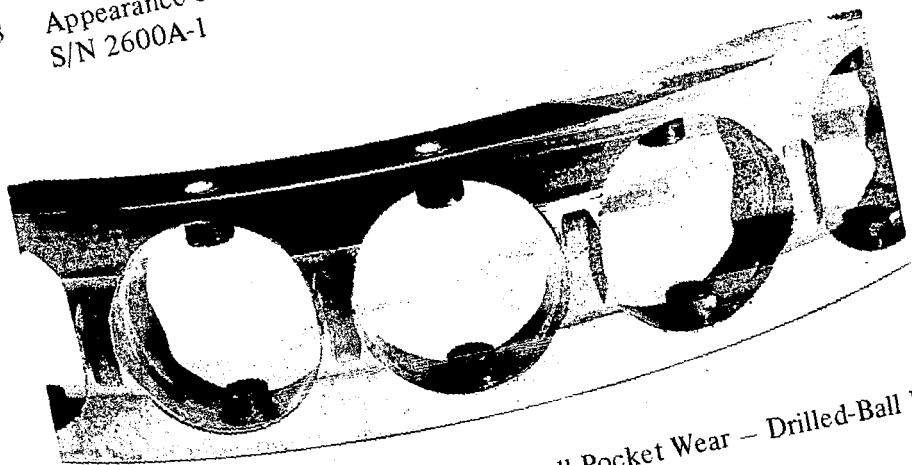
Appearance of Cage Pin and Ball Pocket Wear - Drilled-Ball Bearing
